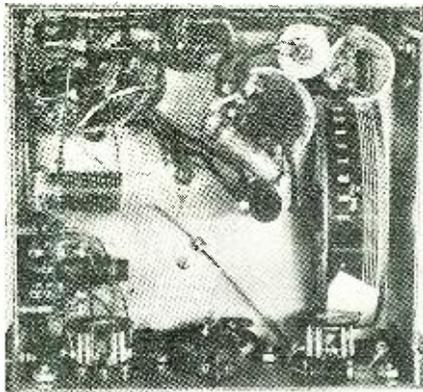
Under chassis view showing wiring and placement of component parts. The triple .05 microfarad condenser is shown in upper right hand corner.
